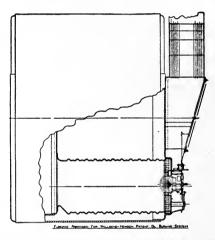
Arrangement of Howden system of forced draft on Scotch boiler. (Oil.)
